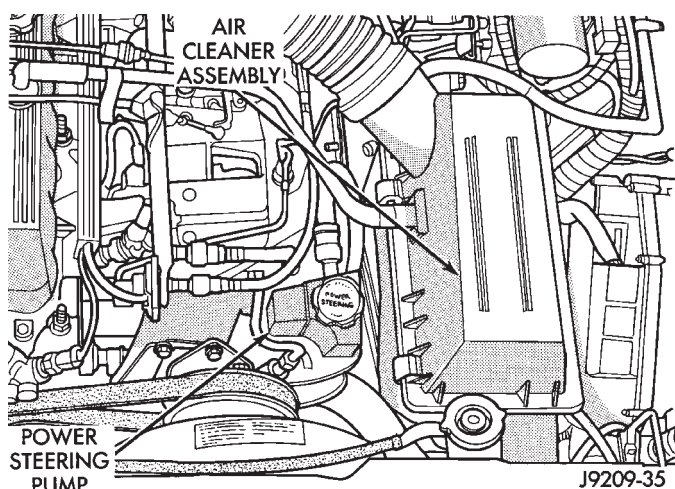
Air Cleaner Assembly & Power Steering Pump
